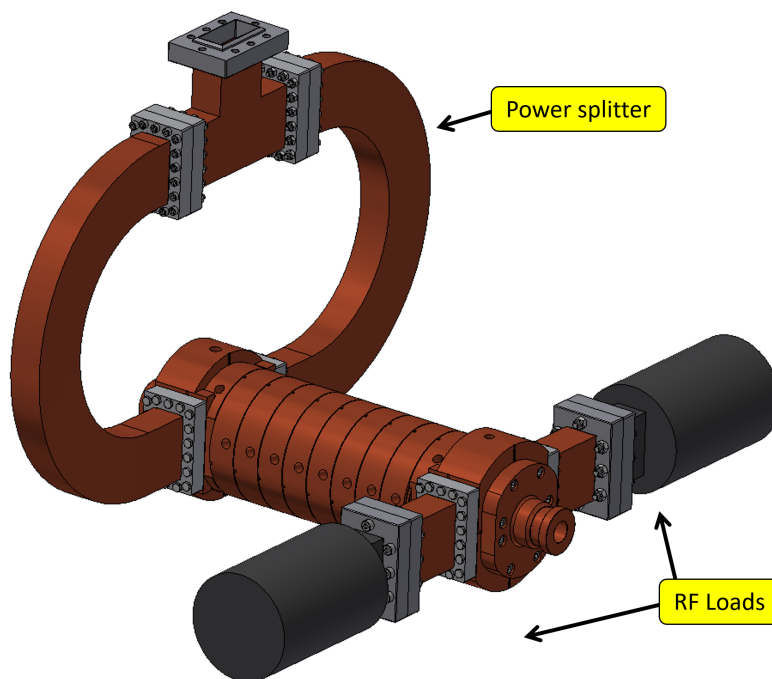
Mechanical drawing of the 10 cells S-band TW Linac realized with the gasket-clamped technique in his final configuration.
